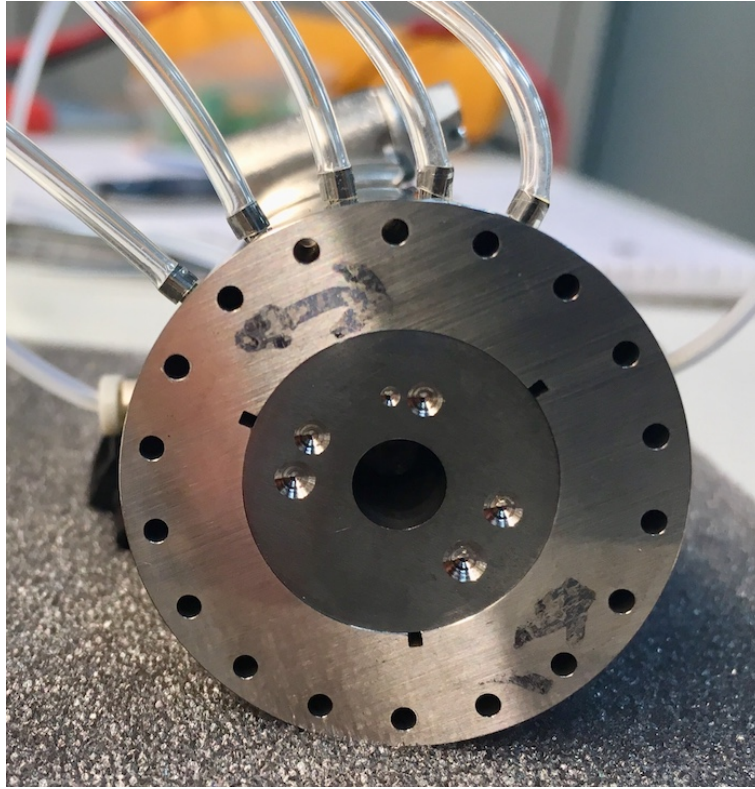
Rotor-Bearing assembly, with marks of balancing visible
